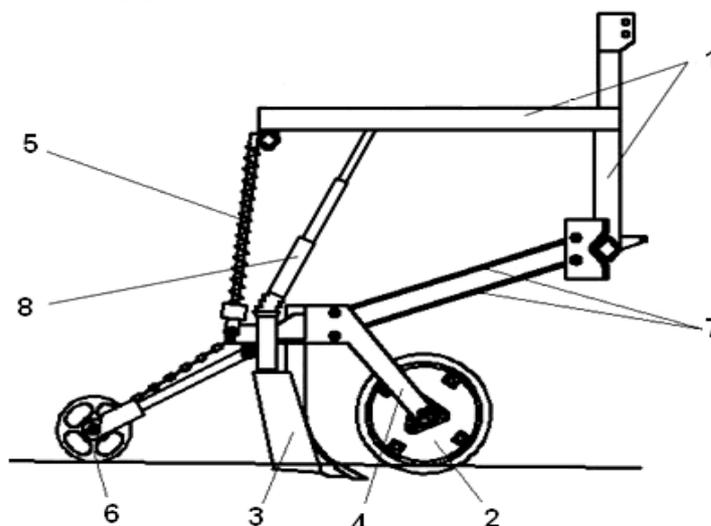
Constructive scheme of working section of grassland oversowing machine [3]:
